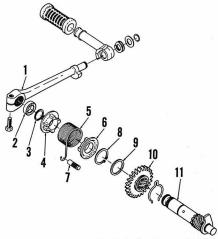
Exploded view of kickstarter assembly. Kick gear is engaged with idle gear only when in use.
